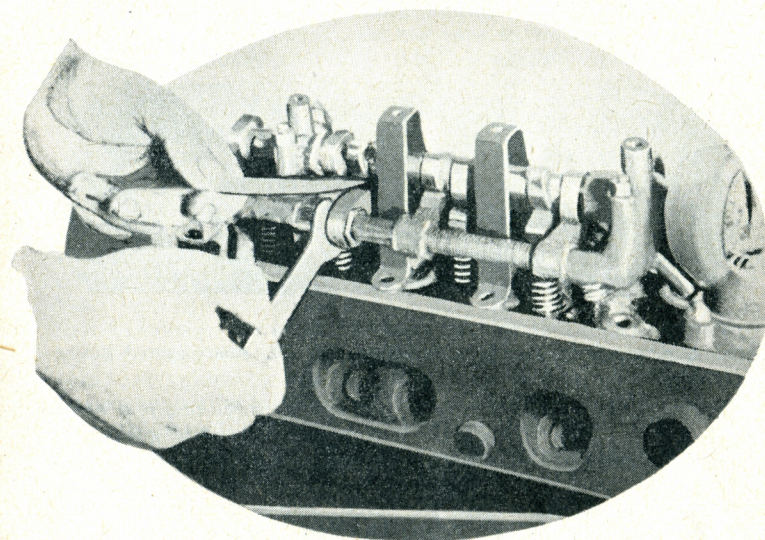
ADJUSTING THE VALVE CLEARANCE
